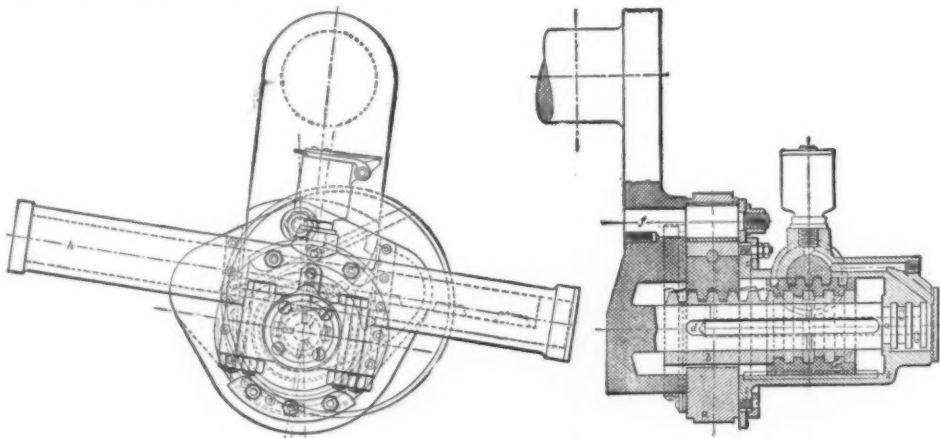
SECTION AND SIDE VIEW OF THE LENTZ REVERSING MECHANISM.
